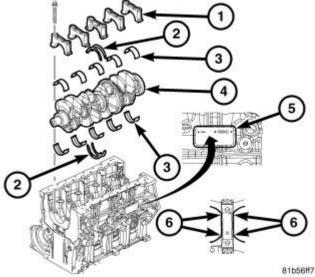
Main Bearing Size Mark On Block Courtesy of CHRYSLER LLC
